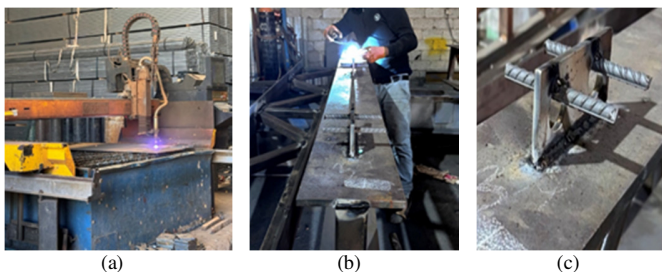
SCTG PRL implementation: (a) steel plate cutting machine, (b) PRL and hole bars welding, (c) shear connector final shape.
